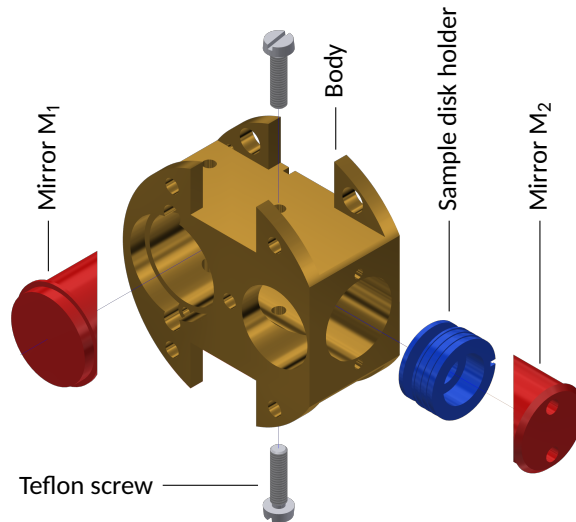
High-temperature high-voltage Voigt probe exploded layout. Fasteners have been omitted for clarity.
